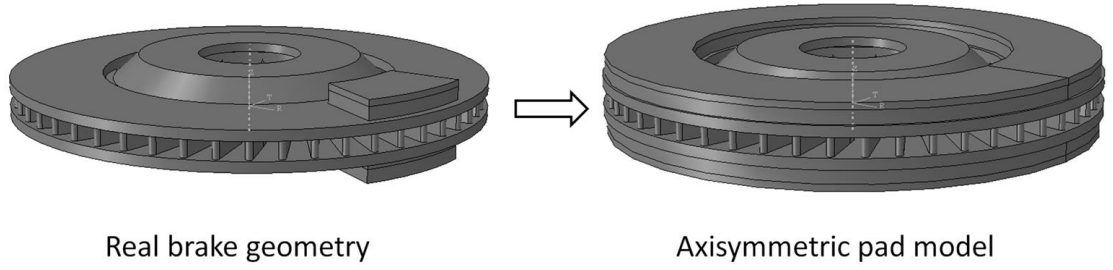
Real brake disc and friction material (lining) and back-plate model (left) and axisymmetric brake pad model with lining and back-plate (right)
